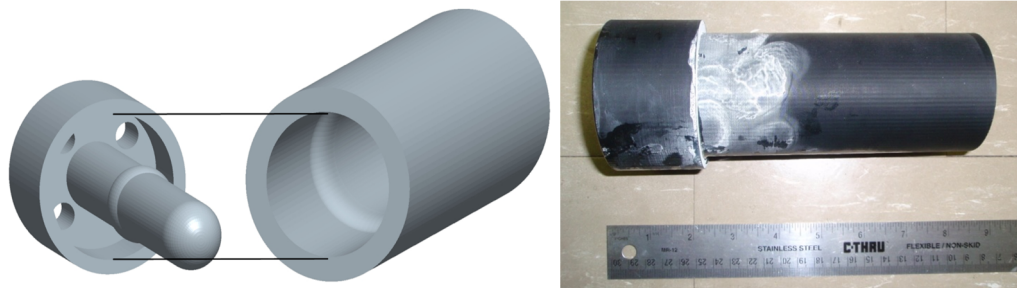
A & B: (A, on left) Pro Engineer Wildfire 4.0 rendition of the disassembled two-part ABS mold for creating  $\alpha$ -prototype bladder (B, on right) Photograph of rapid prototyped two-part mold assembled
